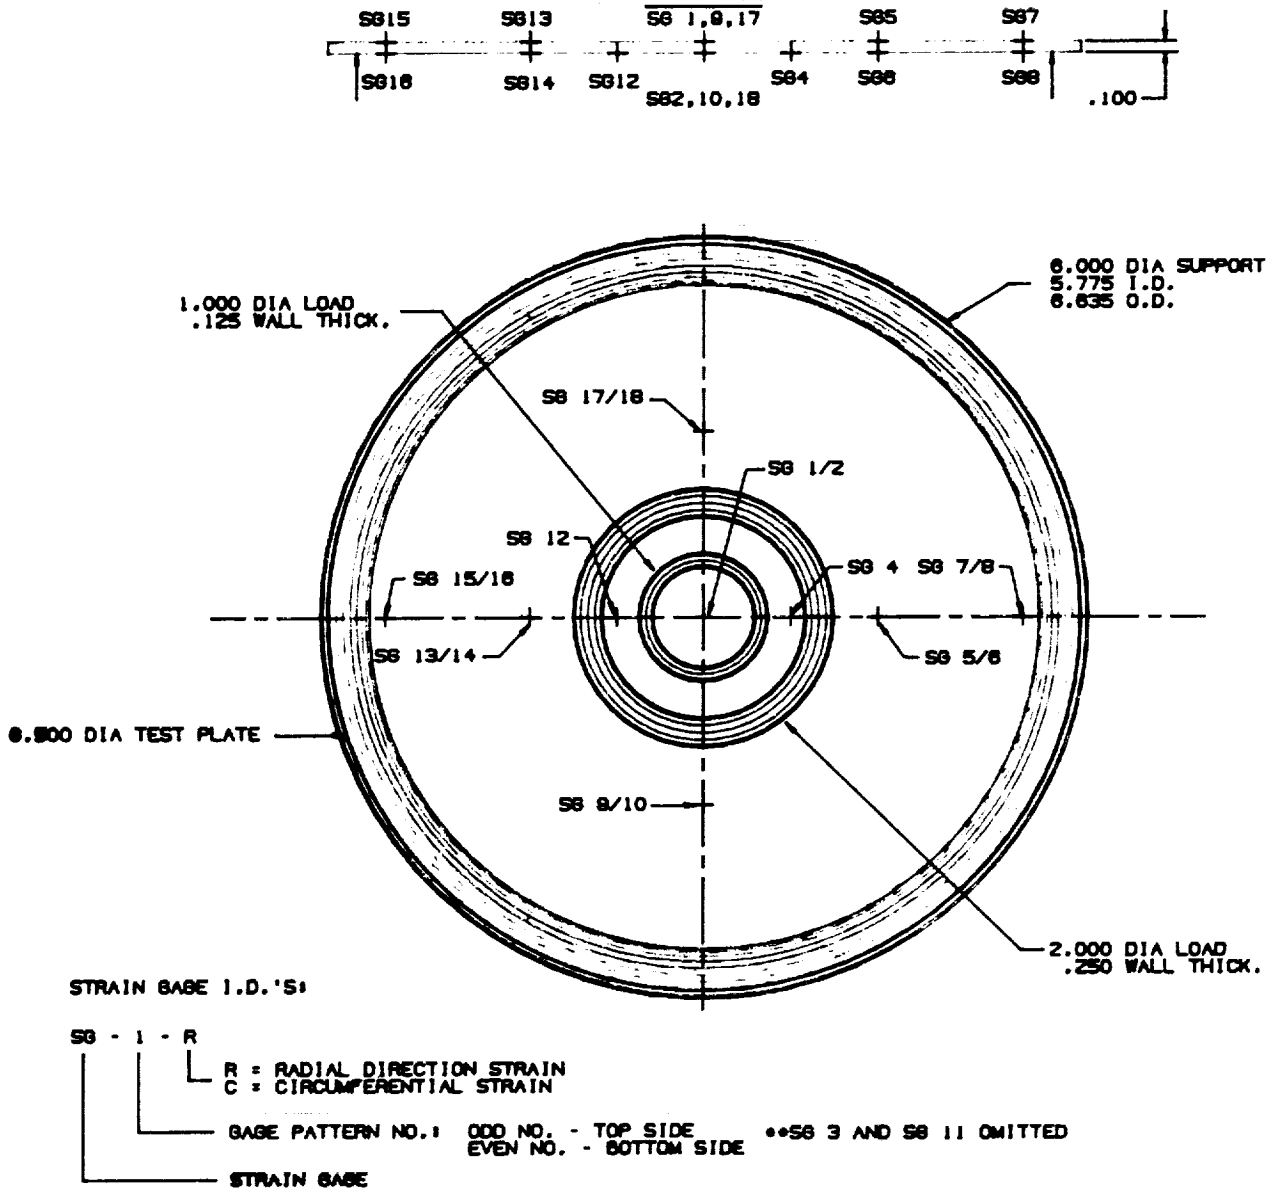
Sketch of a biaxial disc specimen, showing the placement of the 16 back-to-back biaxial strain gages.
